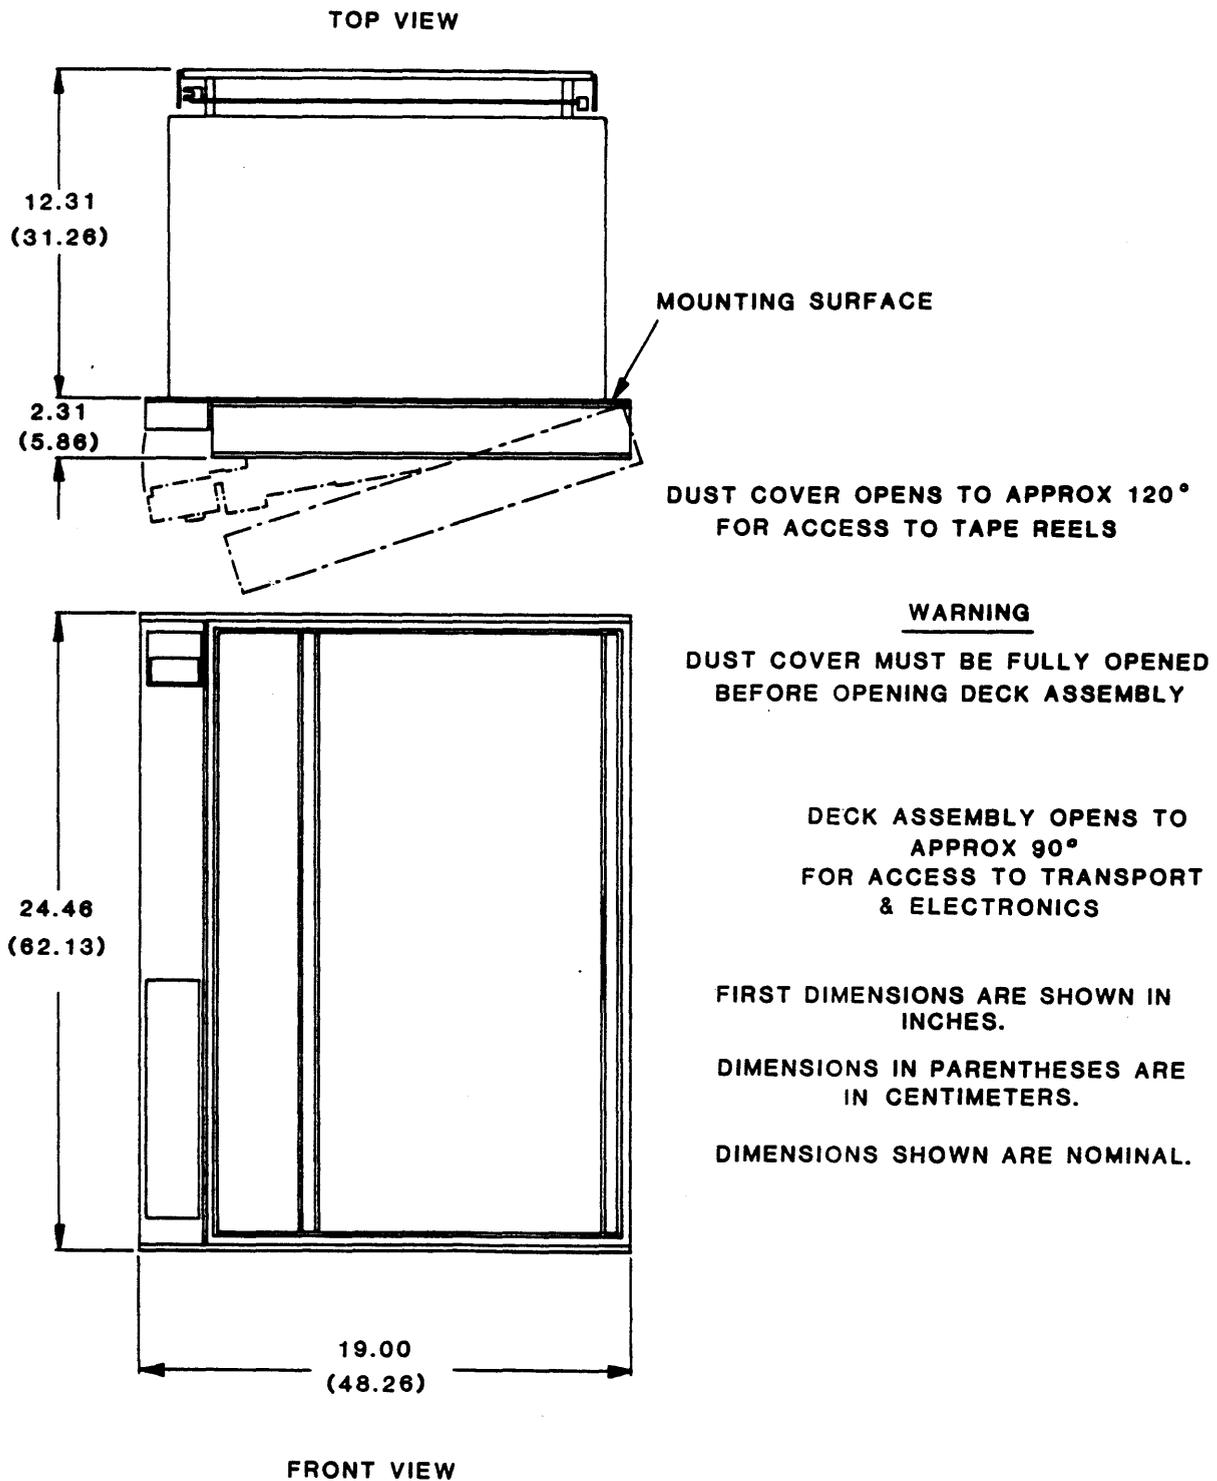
Dimensions, Model 9000 with Embedded Formatter
